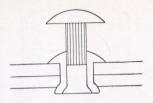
Umbrella plugs made of plastic, copper or aluminum are used with Cherry Rivets to fill the shank or to have the head match or contrast with the color of the material surface. Shank of plug is knurled for easy insertion by finger-tip pressure.
